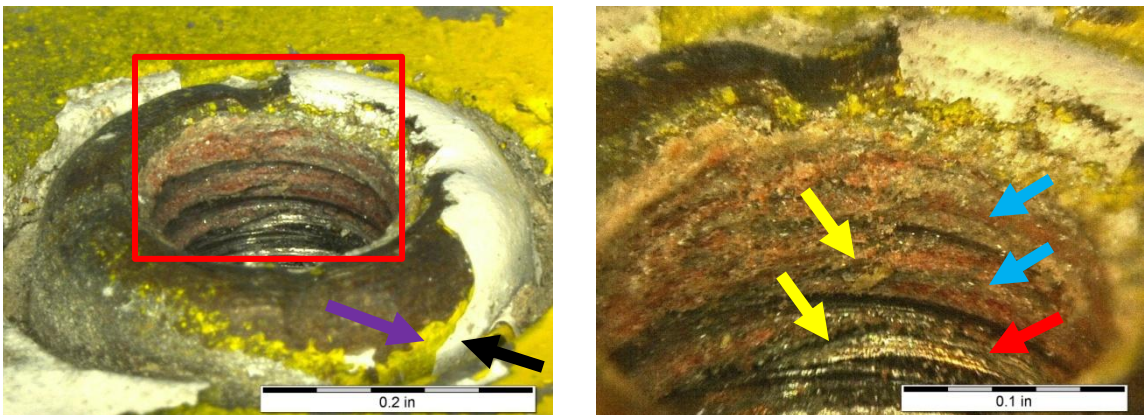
The head of the locknut in the left elevator trim tab outboard hinge, (left) and a closer view of the insert within the red box (right).
